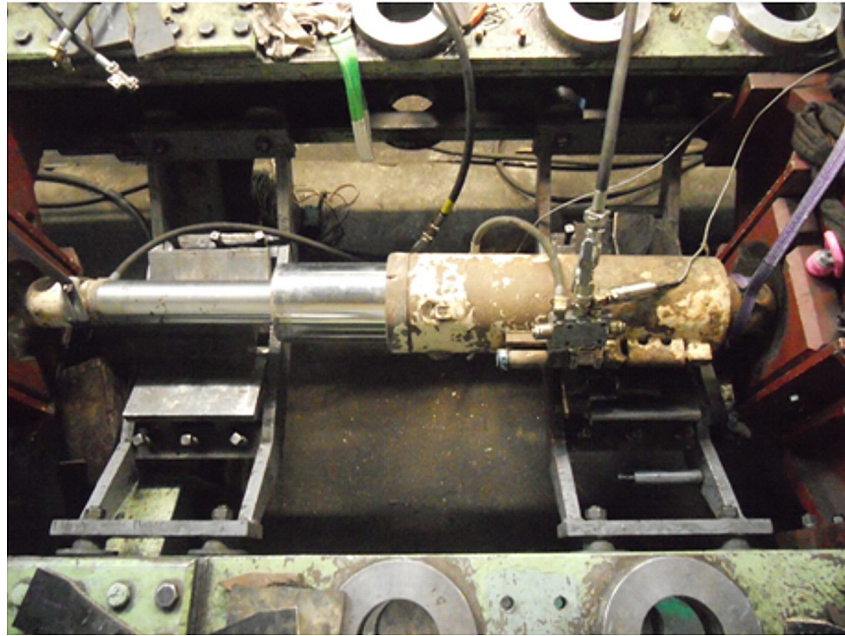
Hydraulic leg Ø0.21/0.16 m installed in Glinik 12/23-POz roof support – static research test bench (GIG's Report, September, 2014).
